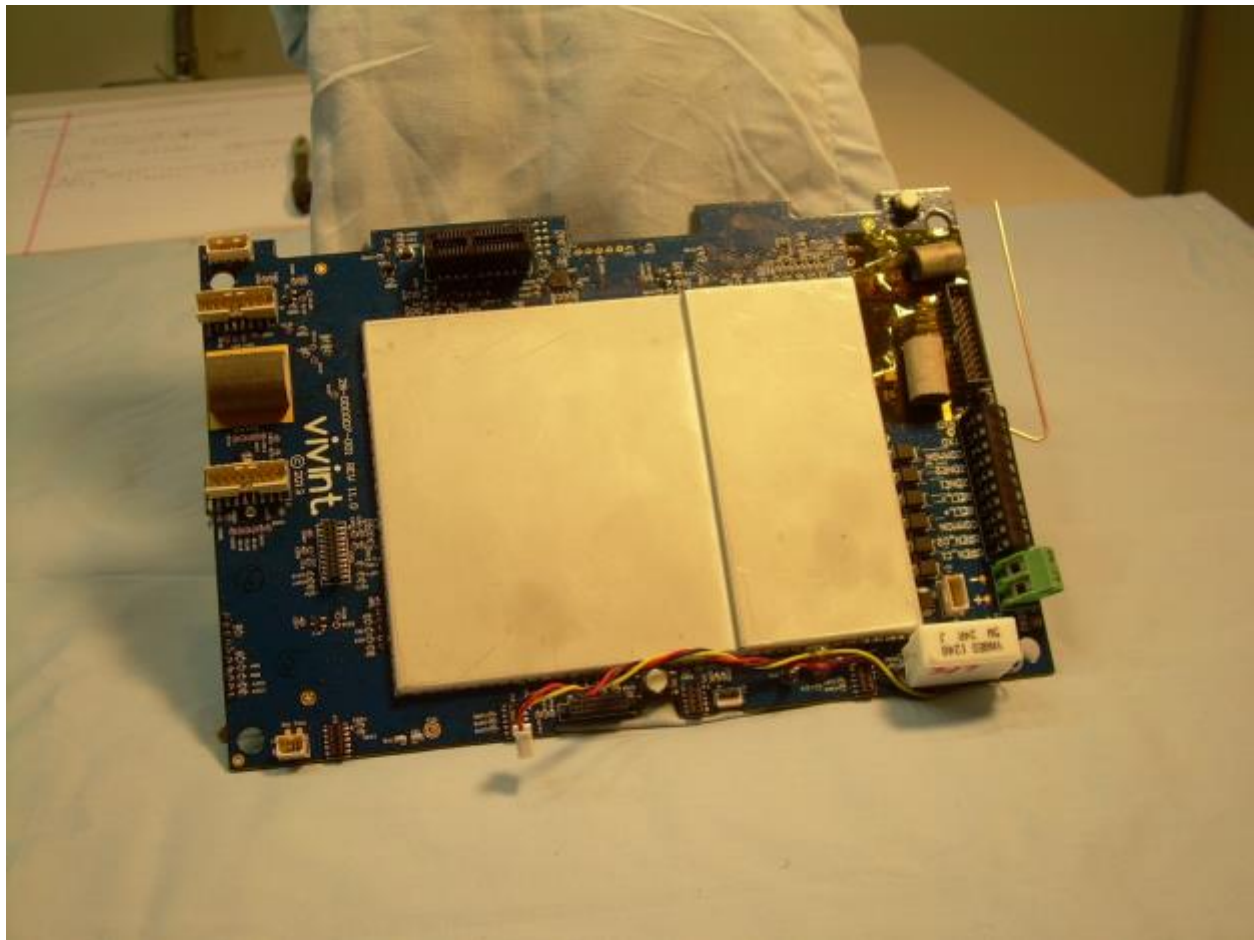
View of the Front Side of the Main PCB with RF Shield In Place
